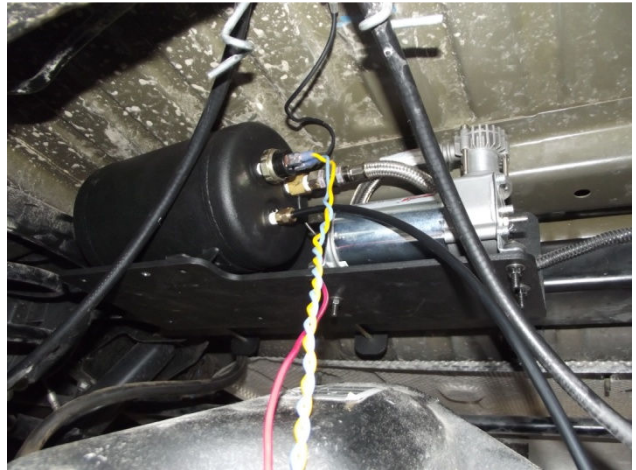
Air tank positioned on mounting bracket. Note how the braided steel leader hose is looped between the compressor body and the mounting bracket.
